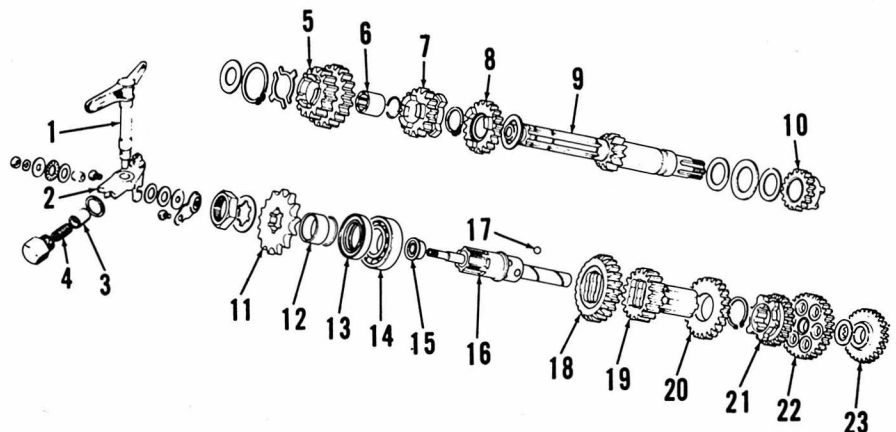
Exploded view of transmission used in TC 90 models. Eight steel balls (17) are used.
